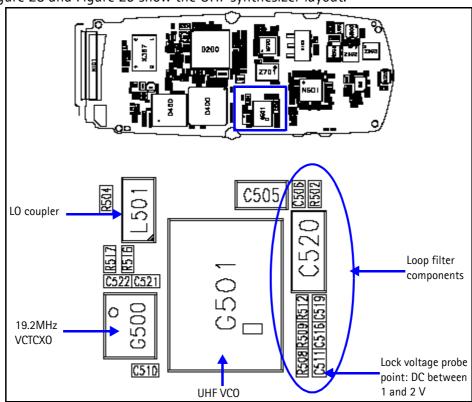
PWB, bottom side (top). A zoomed view of the testing points on the UHF synthesizer layout (bottom).
